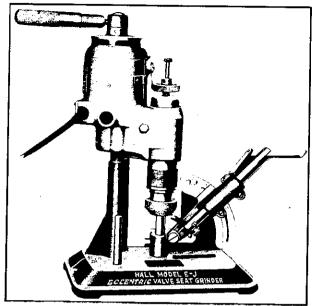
Grinder and Dresser Tool for Grinding Wheel.
